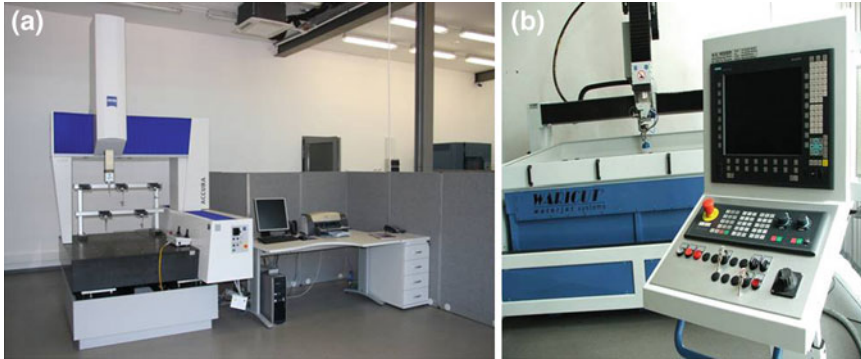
Examples of specialized machines supporting prototyping. a CNC measurement machine, b Water-jet machine tool
